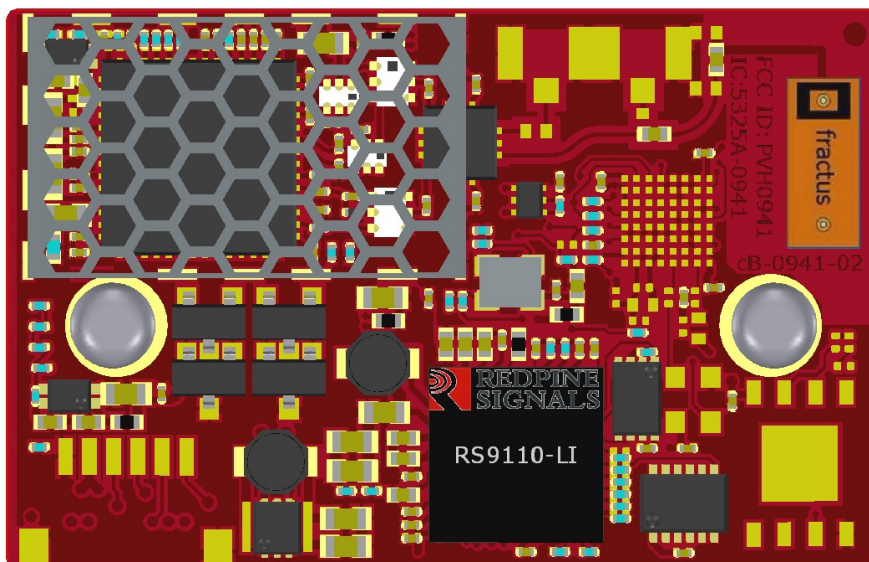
OWL253i FCC/IC identifier printed in the primary side solder mask
